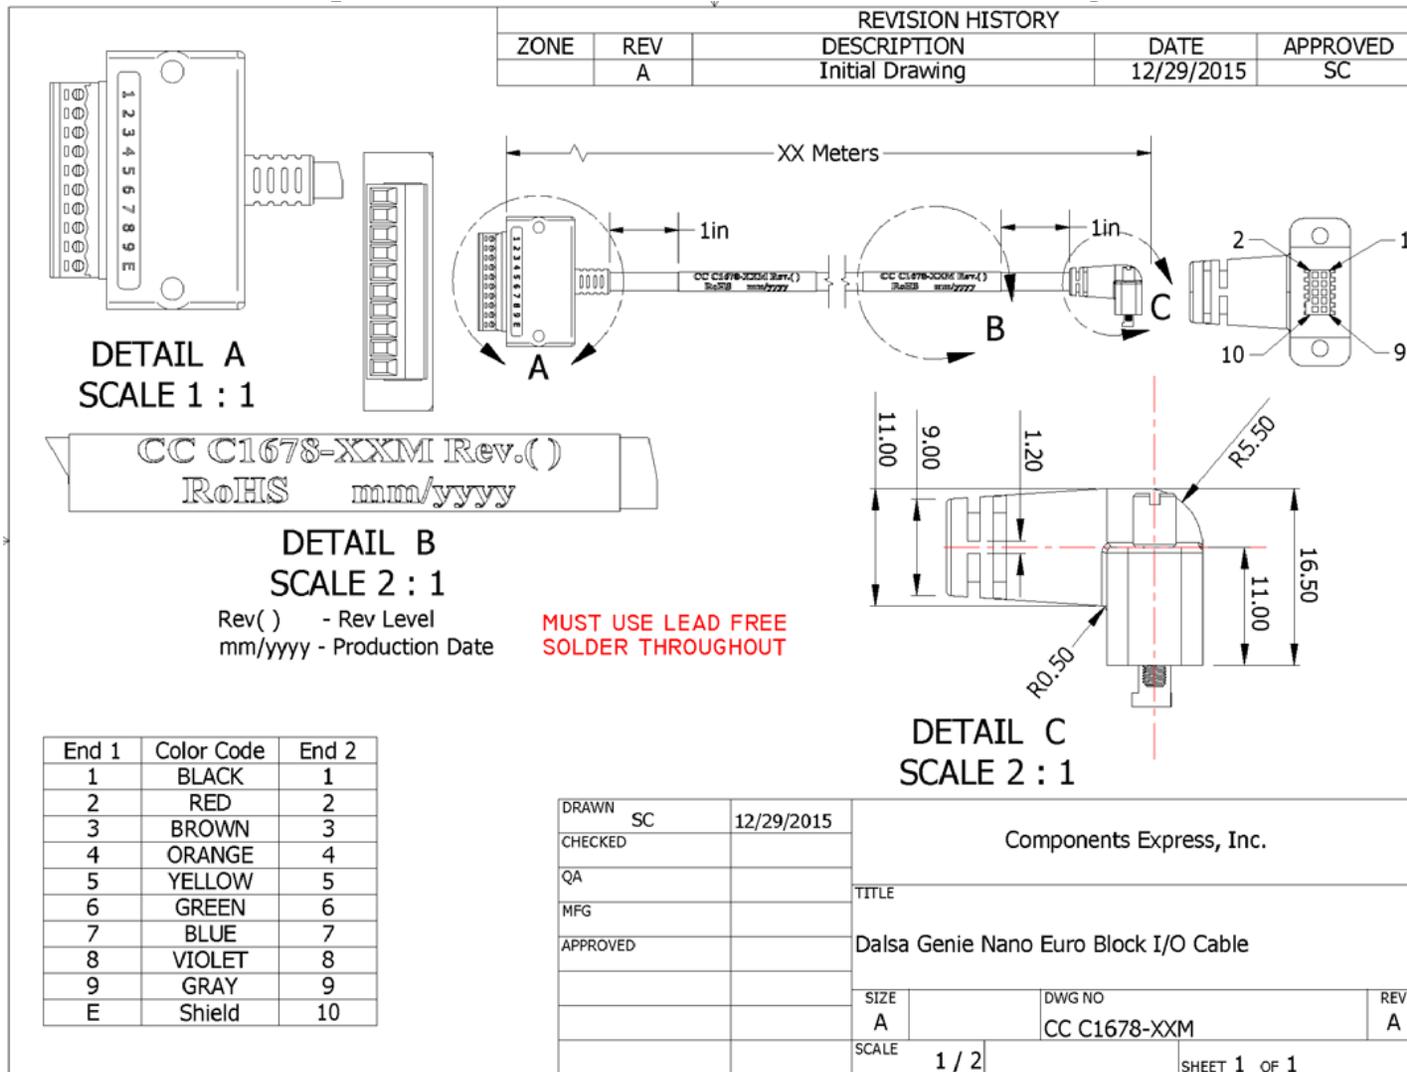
Cable Assembly: Right-Angle I/O to Euro Block
